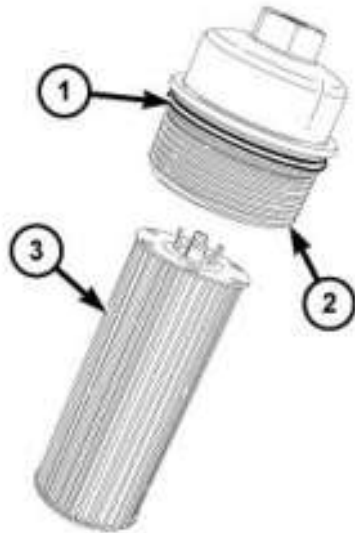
O-Ring Seal, Oil Filter Cap & Oil Filter
